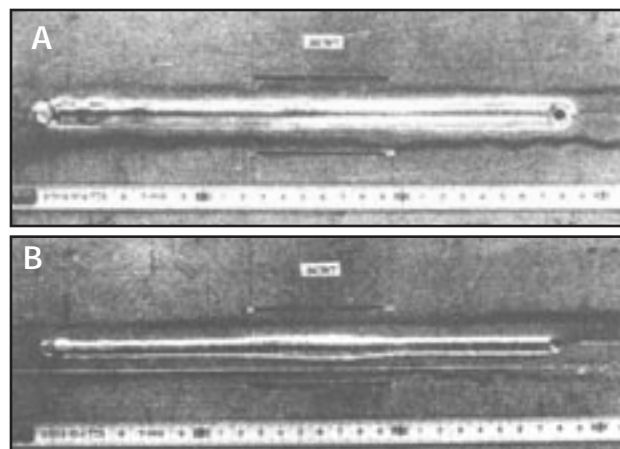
A weld bead with closed loop control of full penetration in a butt joint using wire feed speed as a controlling variable. A — Top face; B — bottom face.
